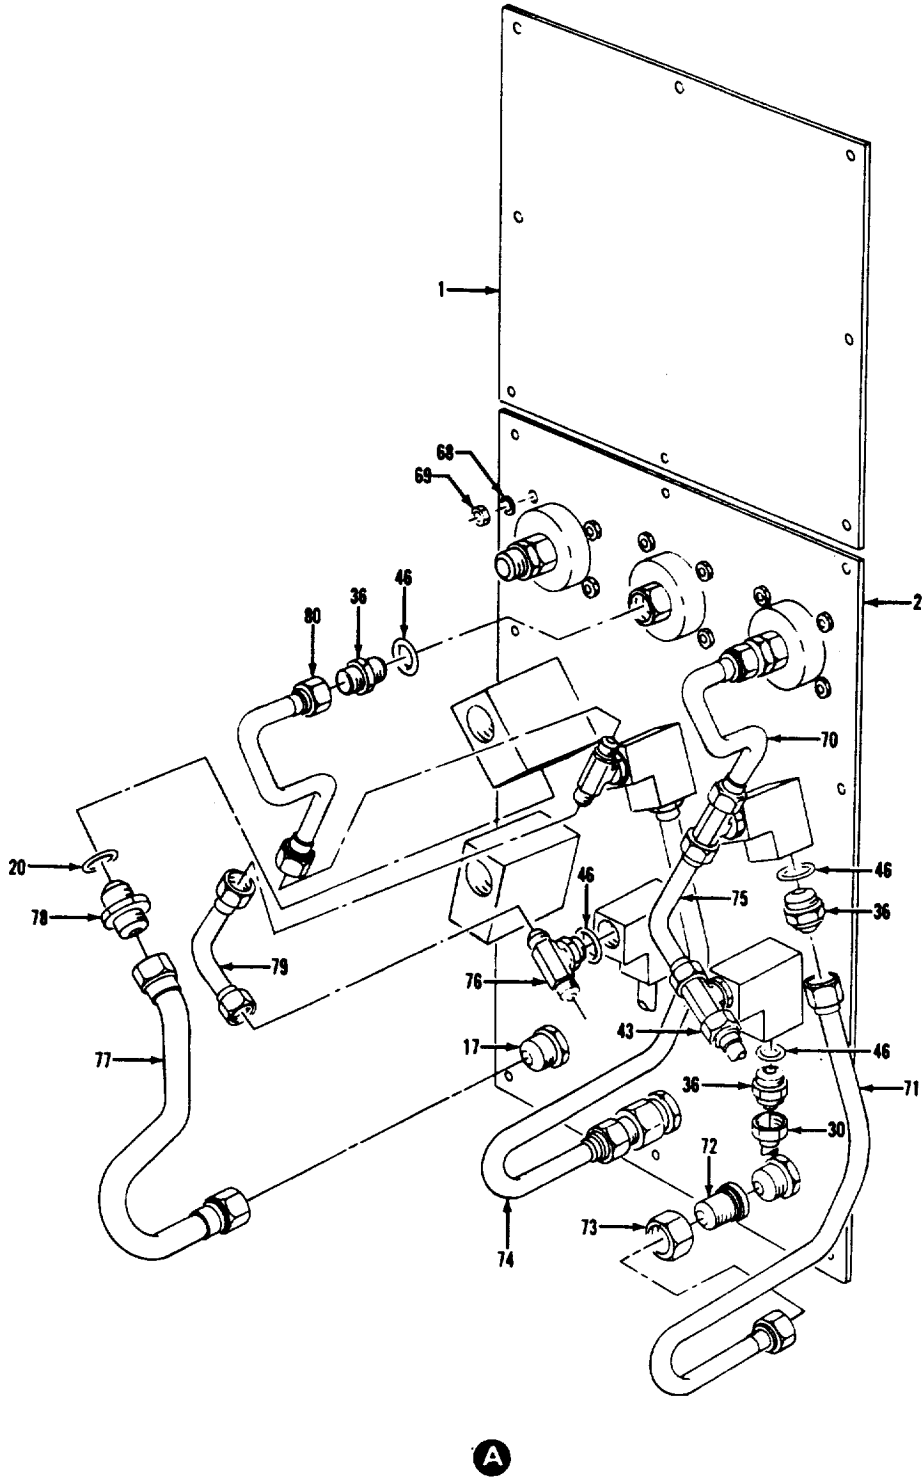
GOX Module Assembly (Sheet 2 of 4)
